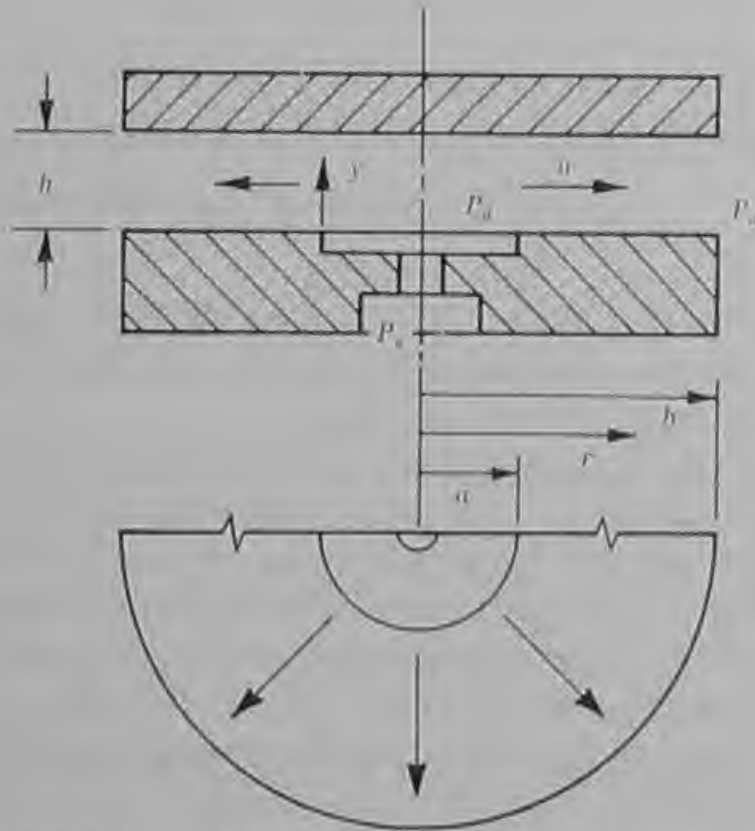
The simple aerostatic thrust bearing with central feed hole and pocket
